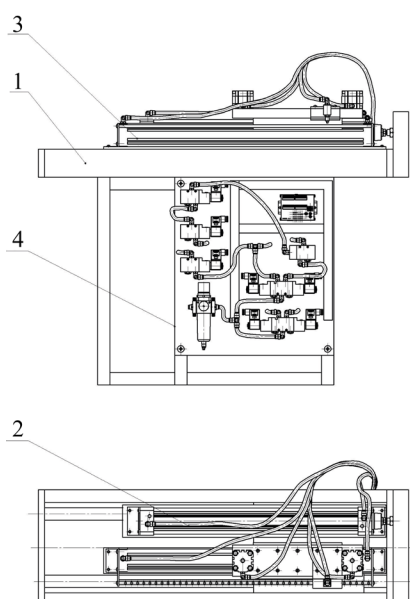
Assembly drawing of the model stand: 1 — stand frame; 2 — loading pneumatic cylinder; 3 — automated long-stroke rodless pneumatic actuator in assembly; 4 — control panel
